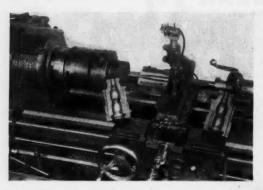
View showing bottle mold in process, with tracer mechanism and template.
